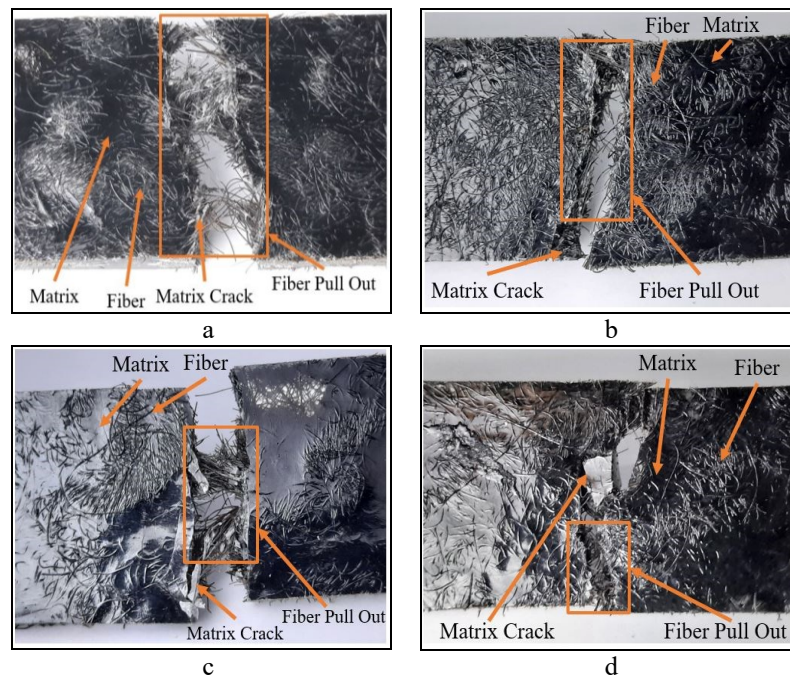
Hair composite tensile test fracture (a) 0°/90°; (b) 15°/105°; (c) 30°/120°; (d) 45°/135°
